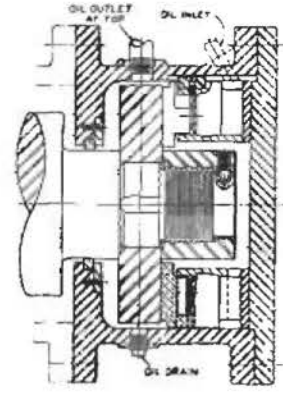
Simple mounting for single horizontal thrust bearing, Style JH, BH or NH. Forced lubrication is used. End flange is provided for attachment to machine.
